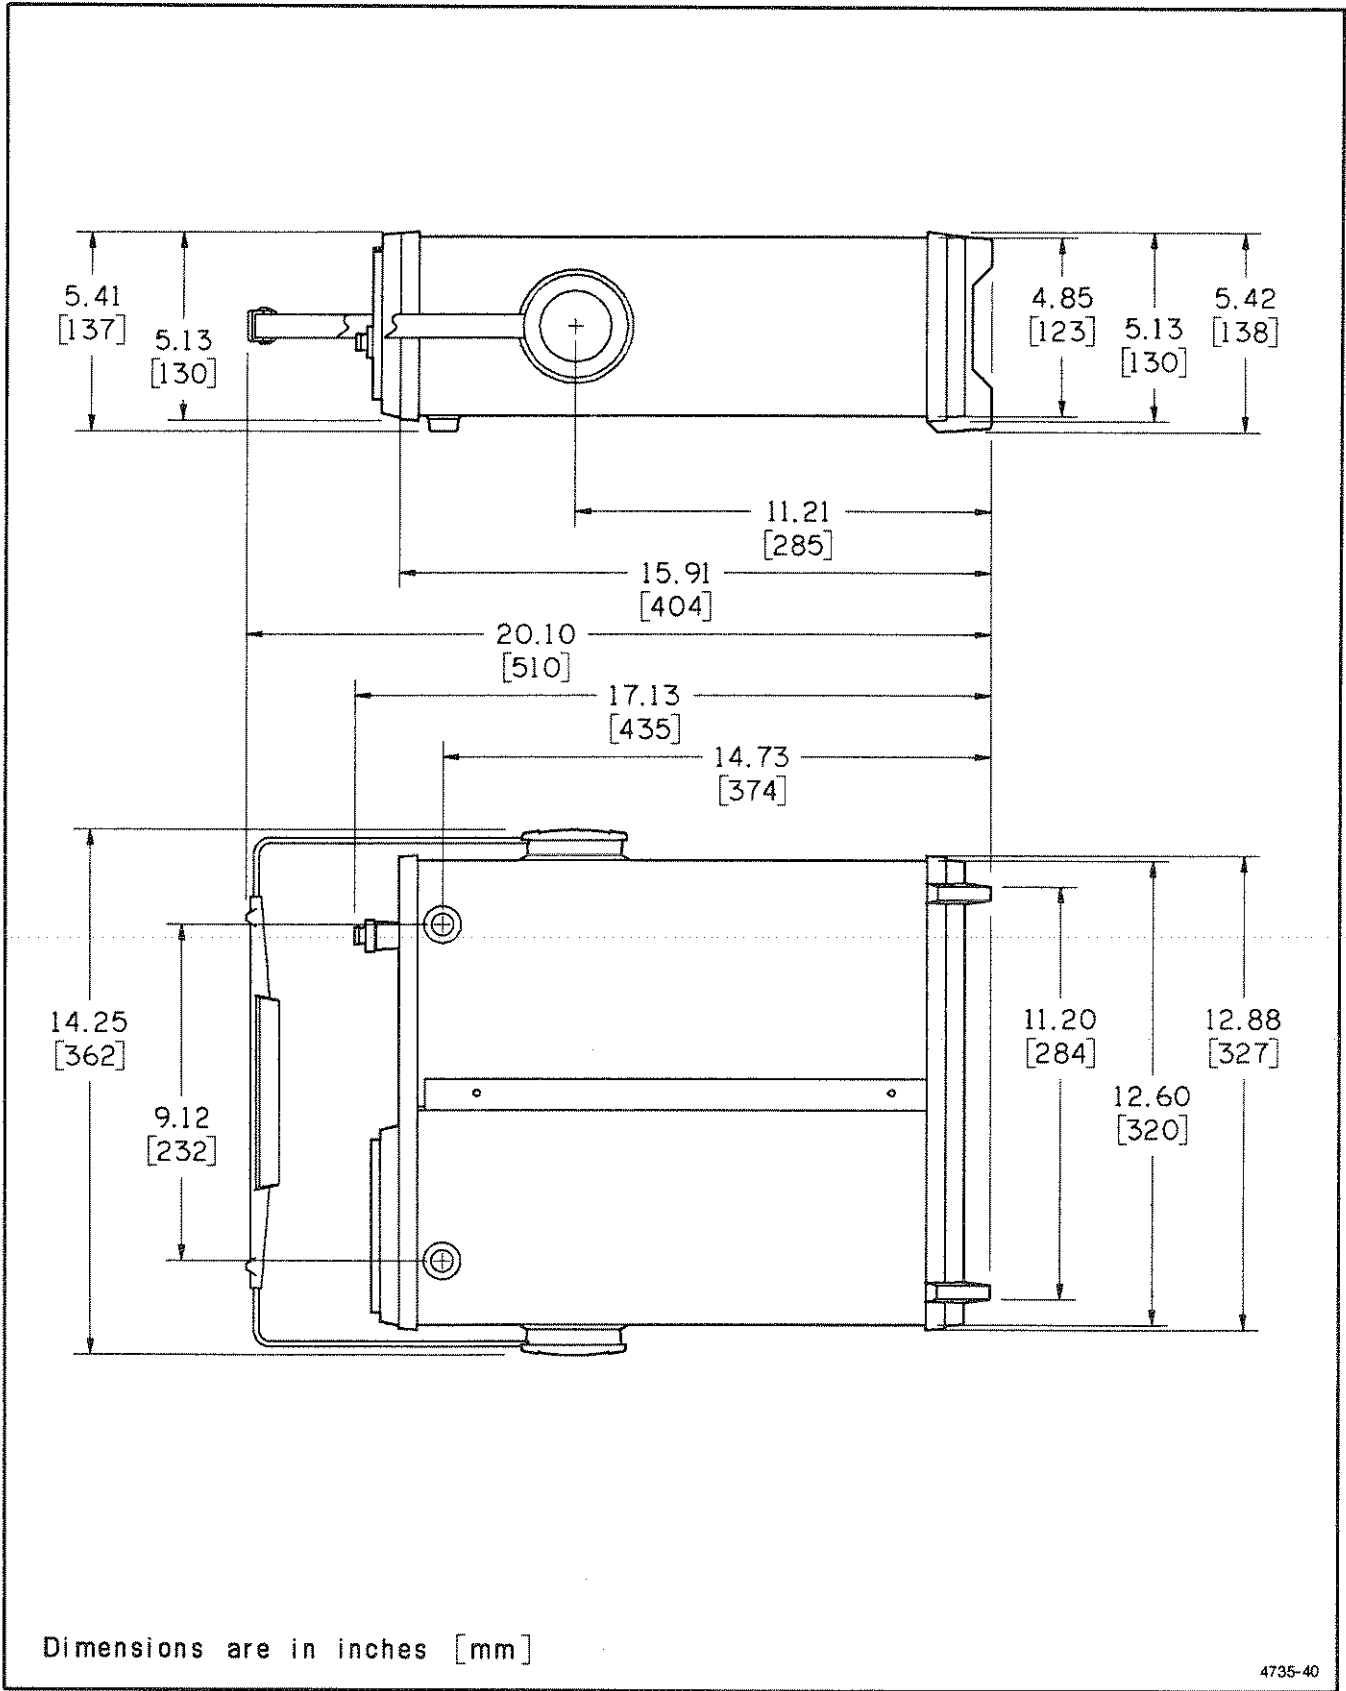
Physical dimensions of the 2220 Oscilloscope.
